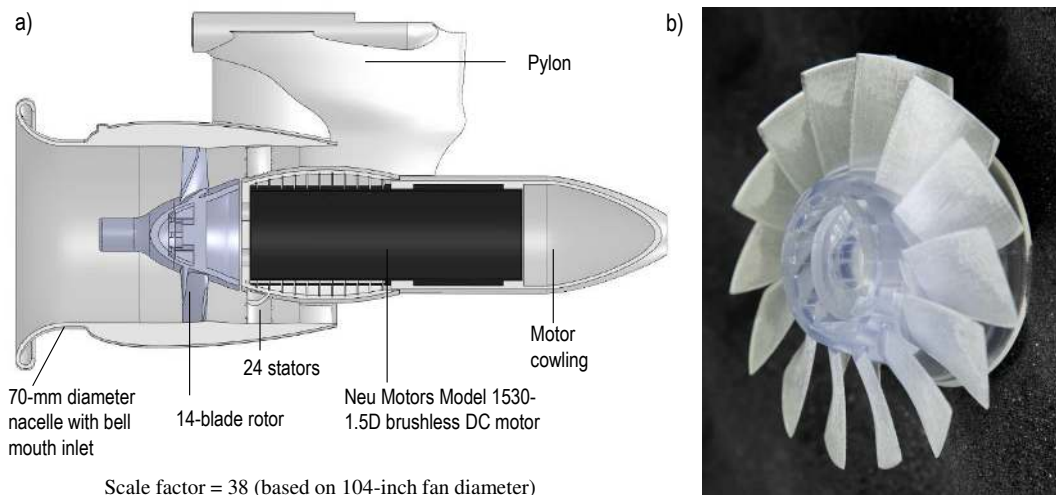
Overview of the ducted fan design. a) Cross-sectional view; b) picture of the 3D printed rotor.
